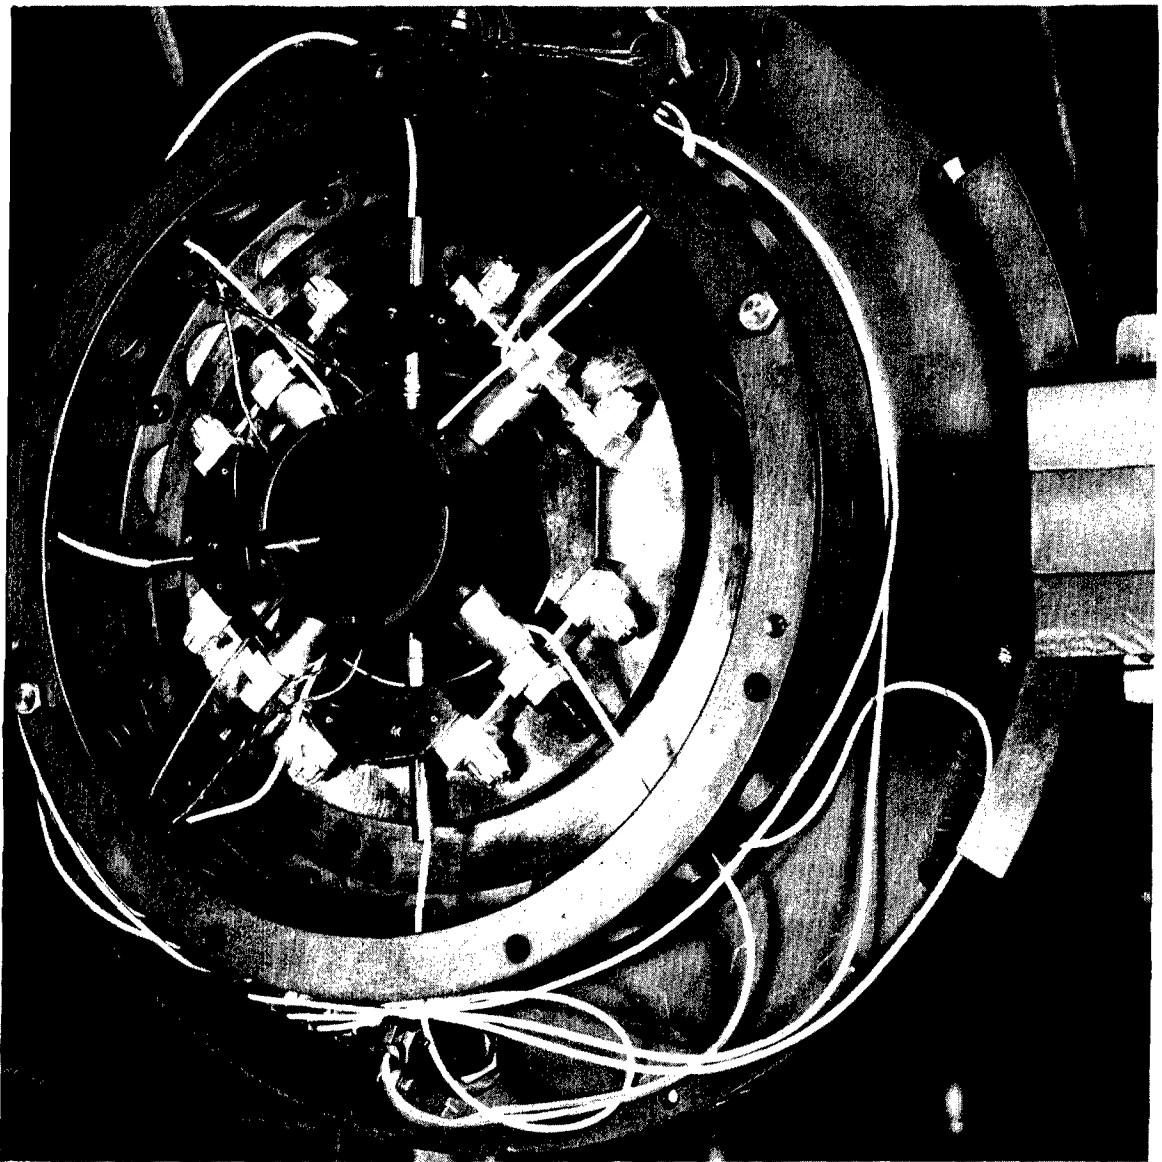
View of the No. 2 Pivoted-Pad Bearing Components
